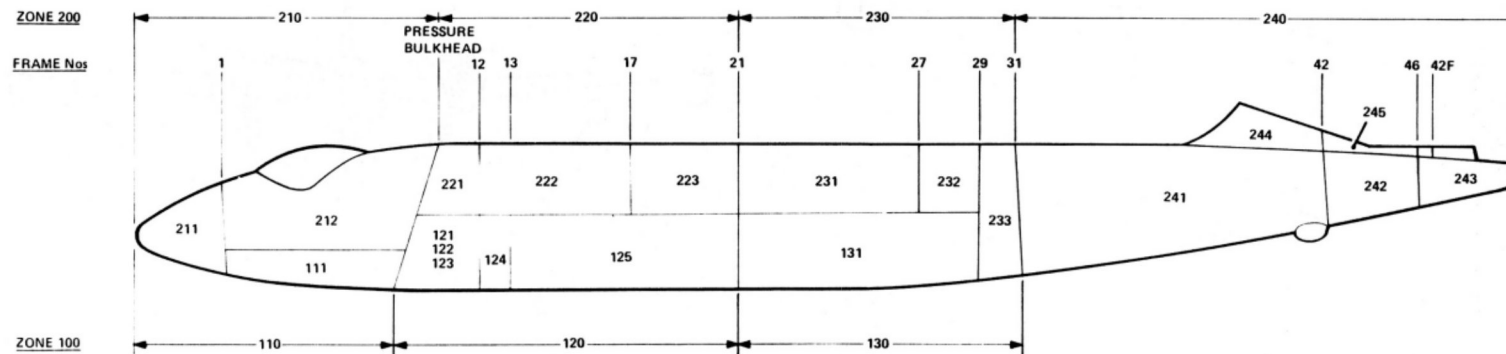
MAJOR ZONES - LOWER AND UPPER FUSELAGE
